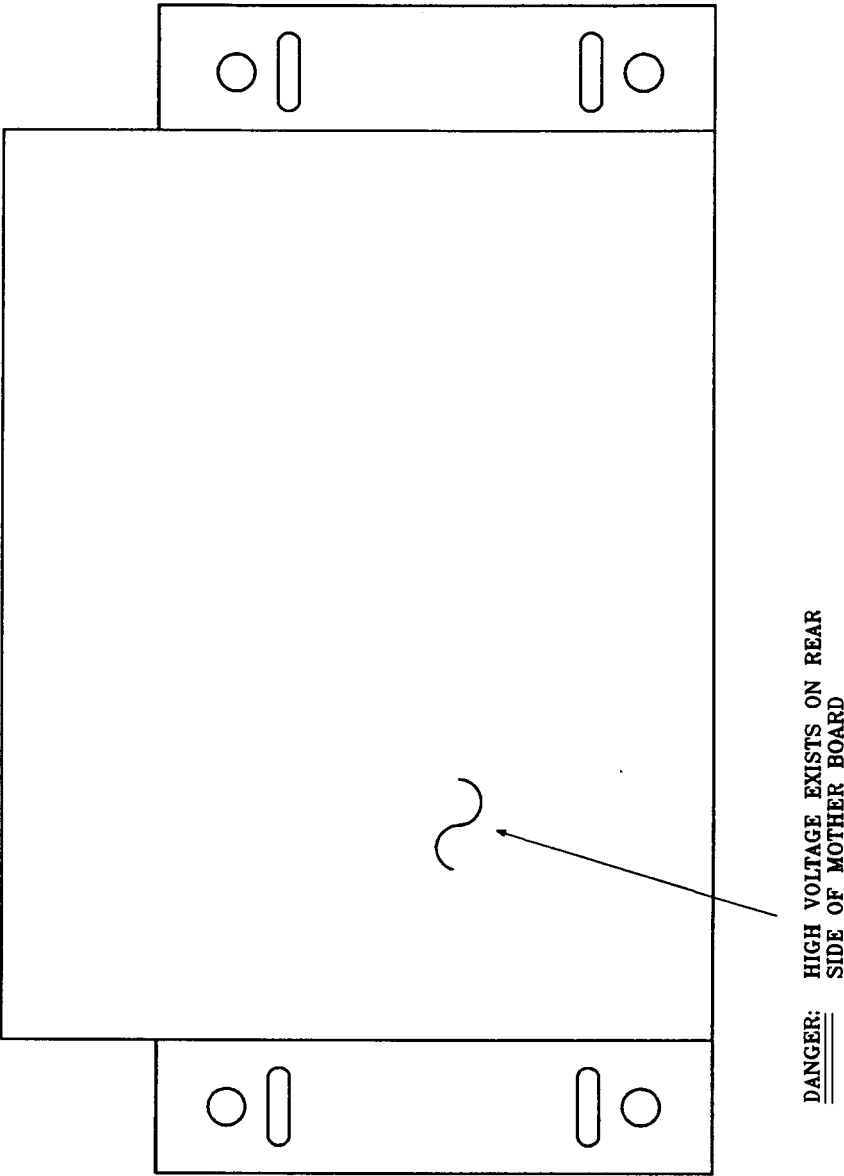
Rear View of DSHR (1/2 DSFR) Mounting Rack
